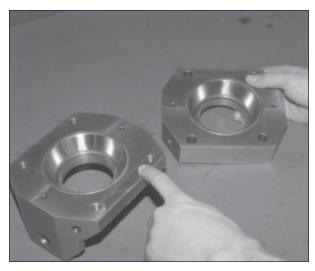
A. Mating surface of bottom plate should be free of grease.
